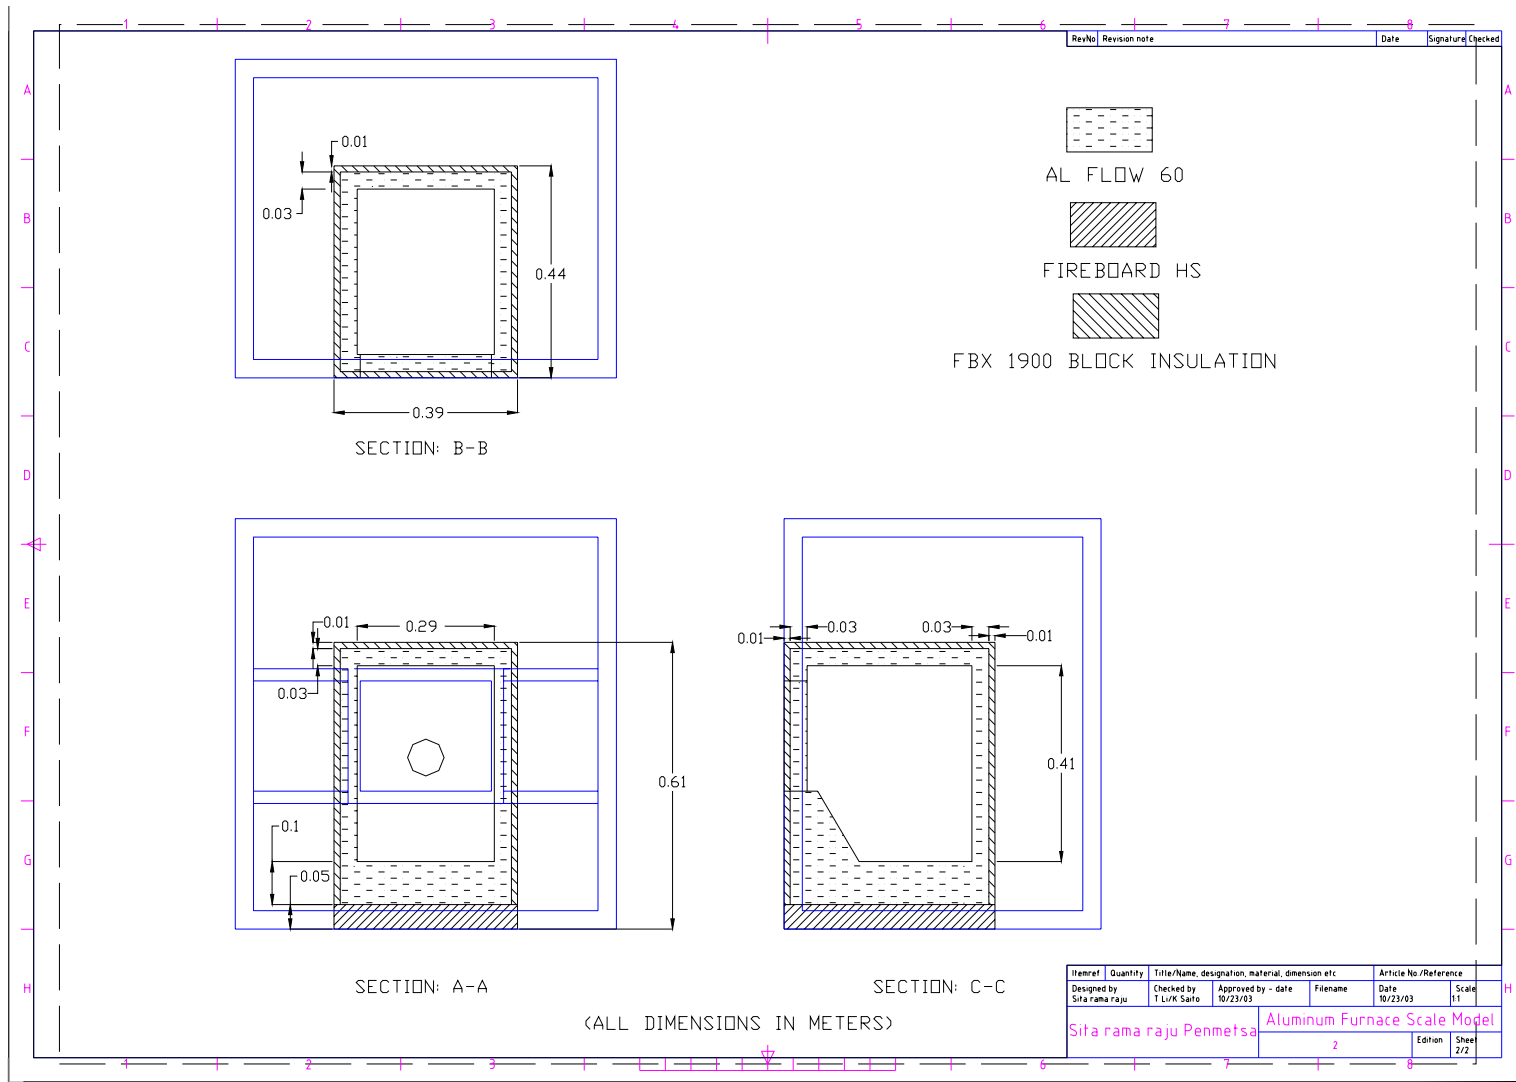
Aluminum Furnace Sectional View in AutoCAD
